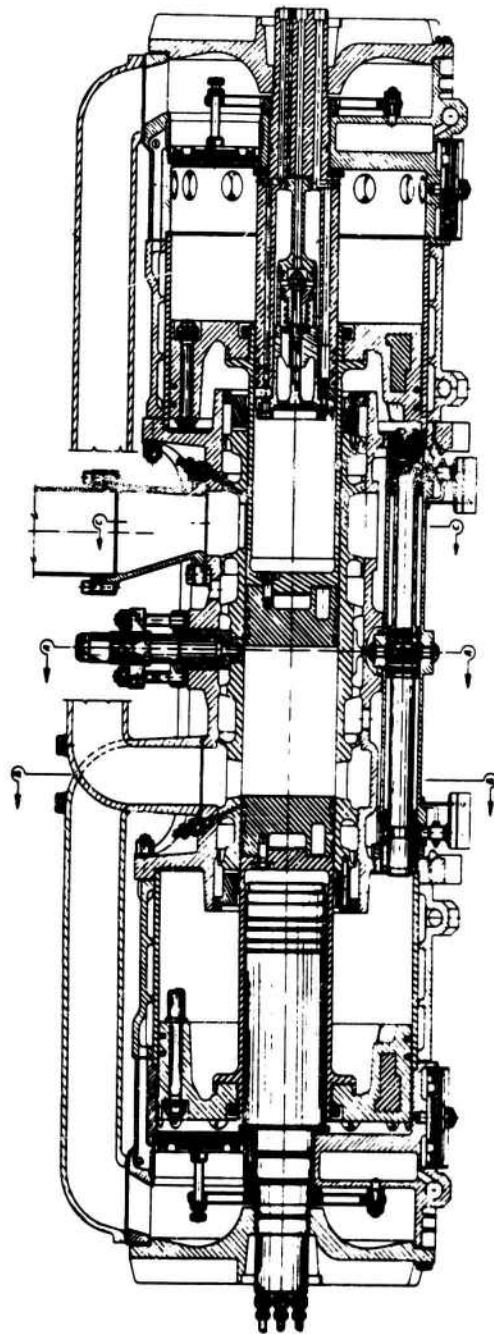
Cross Section of Free Piston Development Co., Ltd.,
